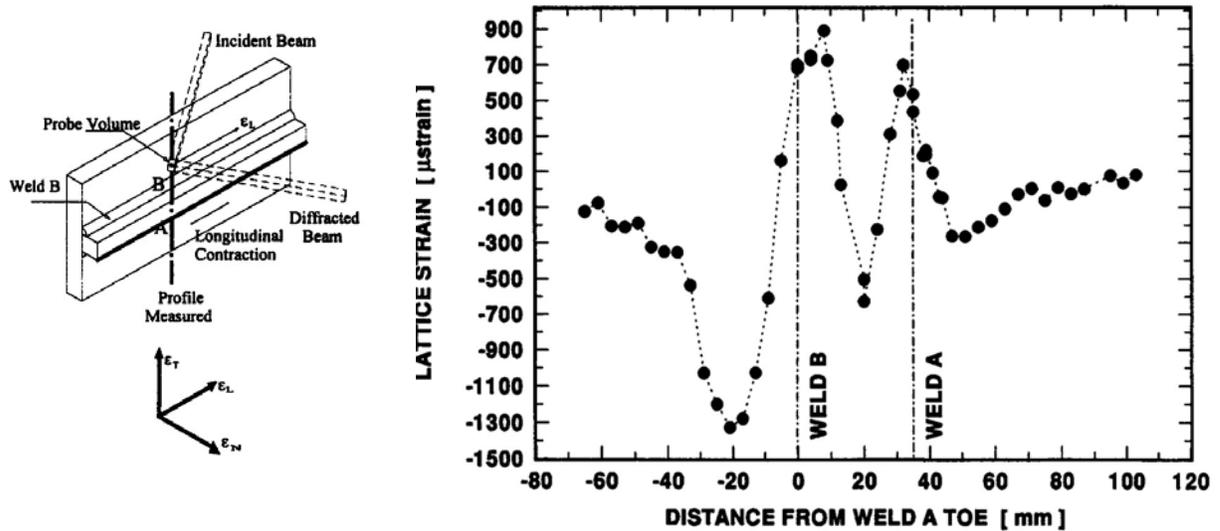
Left: Geometry of the T-butt weld. The welds are located at positions A and B.
